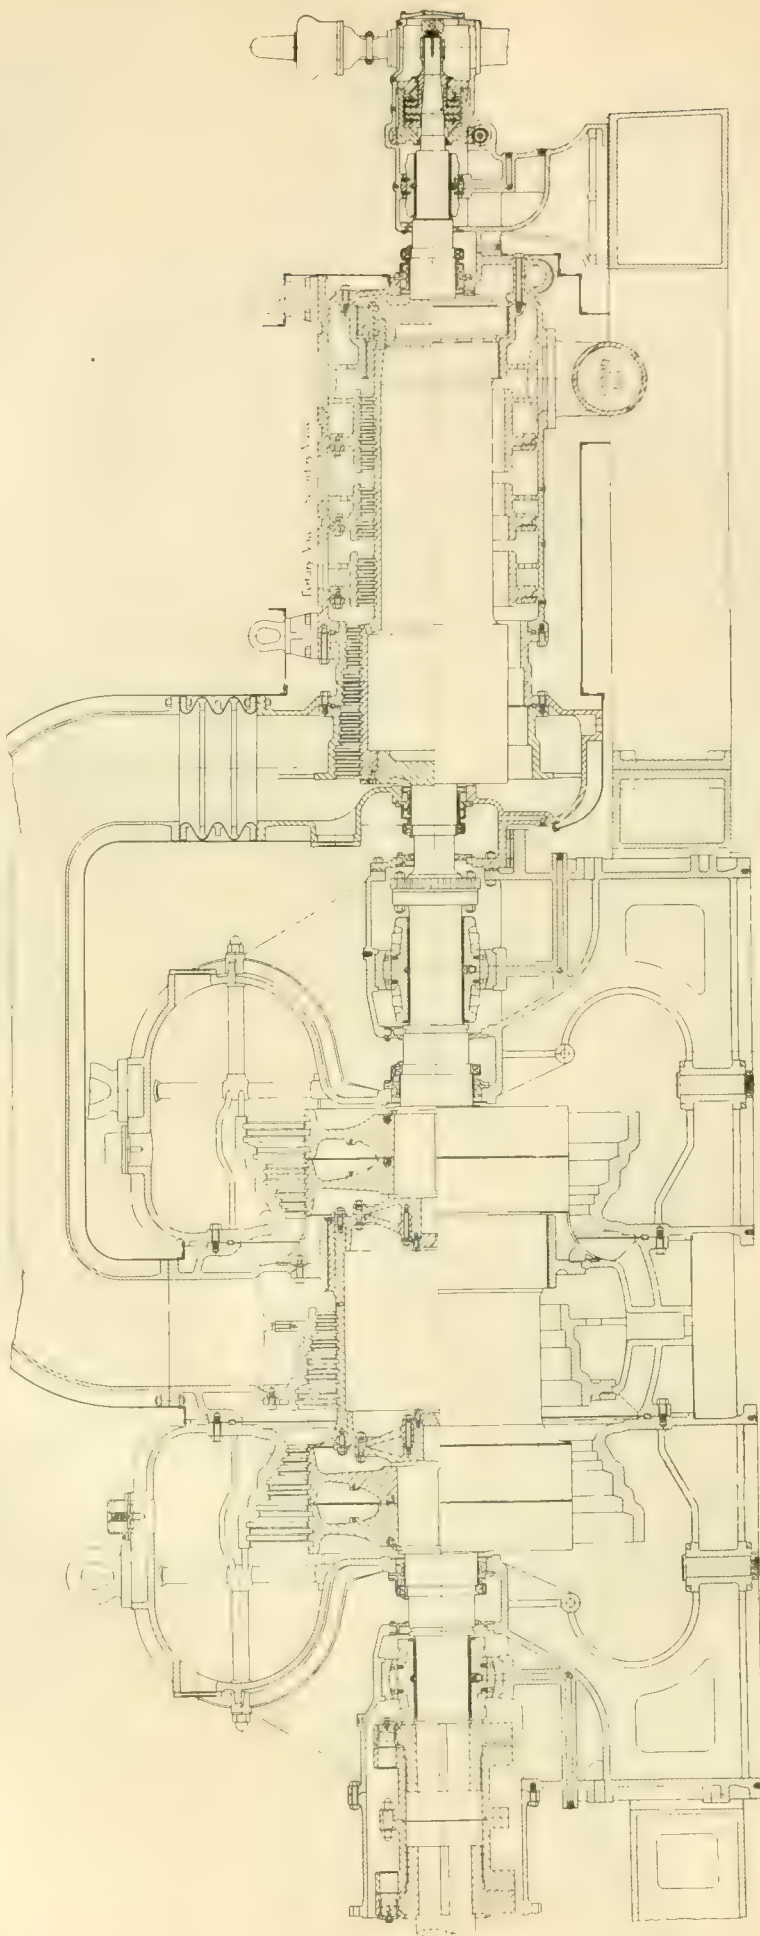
SECTION OF A 35 000 KW. STEAM TURBINE
